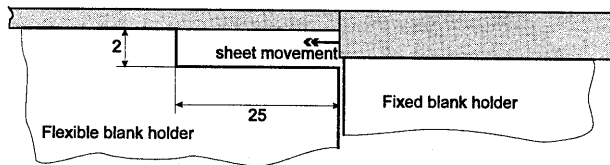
Movement of the thicker material partner in the space excavated from the blank holder
